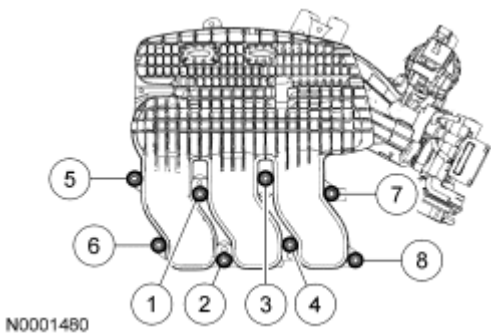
Upper Intake Manifold Bolt Torque Sequence
